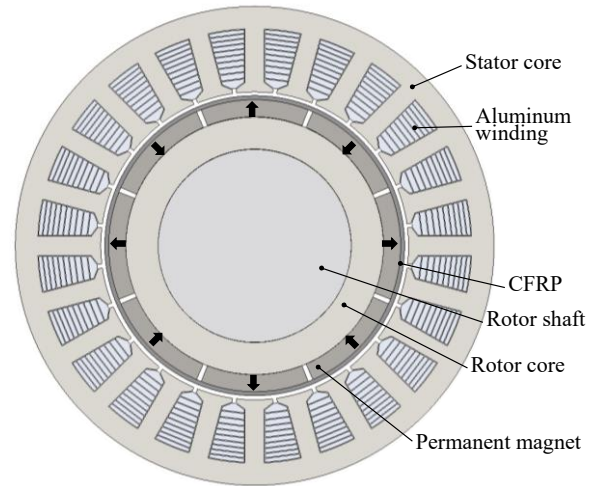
Eight-pole surface permanent magnet machine with distributed aluminum winding.
